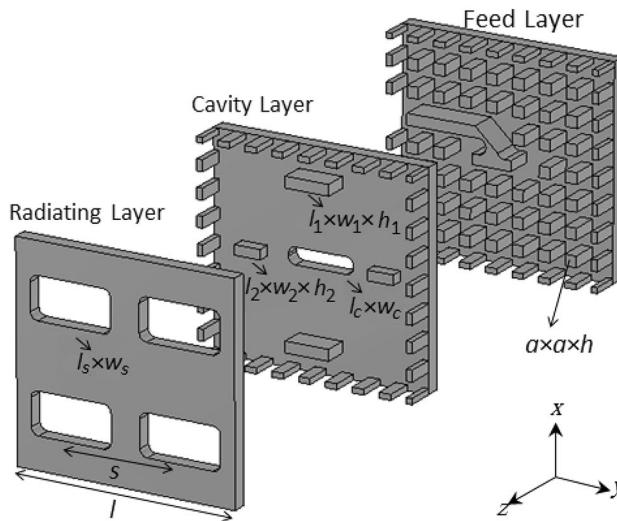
Perspective view of Exploded 2×2 -element subarray.
